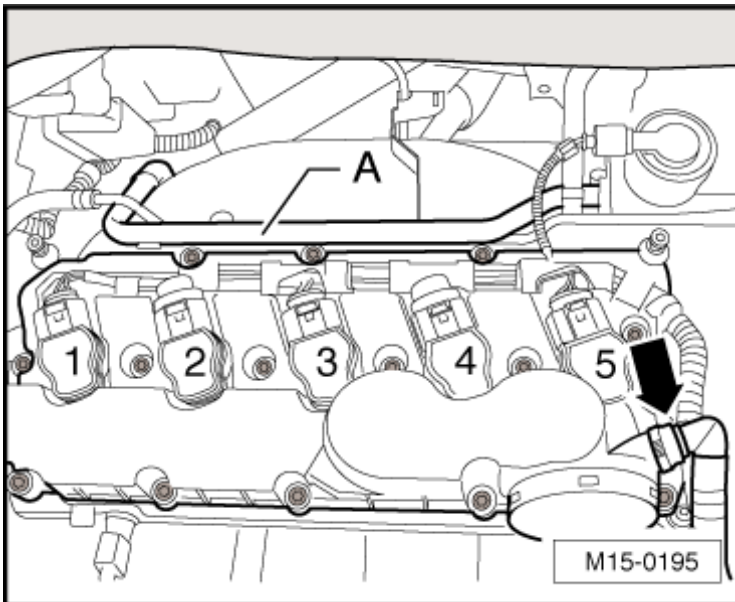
Identifying Air Hose Of Crankshaft Housing Ventilation
